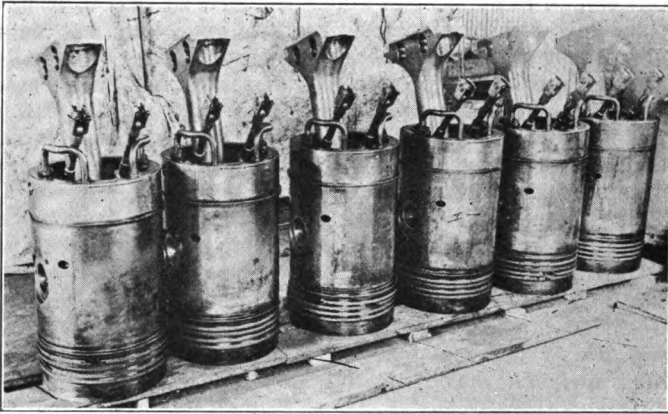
THE PISTONS OF THE 1750-HP. ENGINE REMOVED
